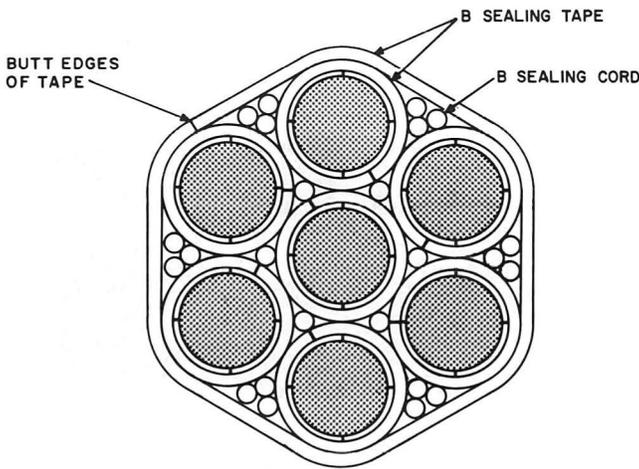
Seven-Stub Cable Arrangement for 21D1 Splice Case
